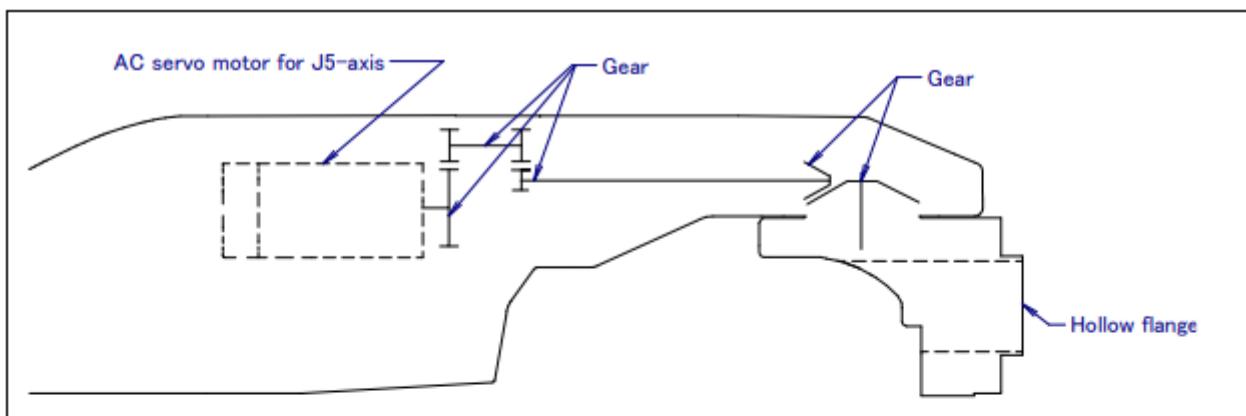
(e) Drive mechanism of J5-axis (ARC Mate 120iC, M-20iA)
